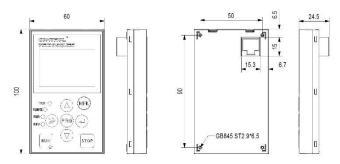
LCD Operating Panel Outline and Mounting Dimension
